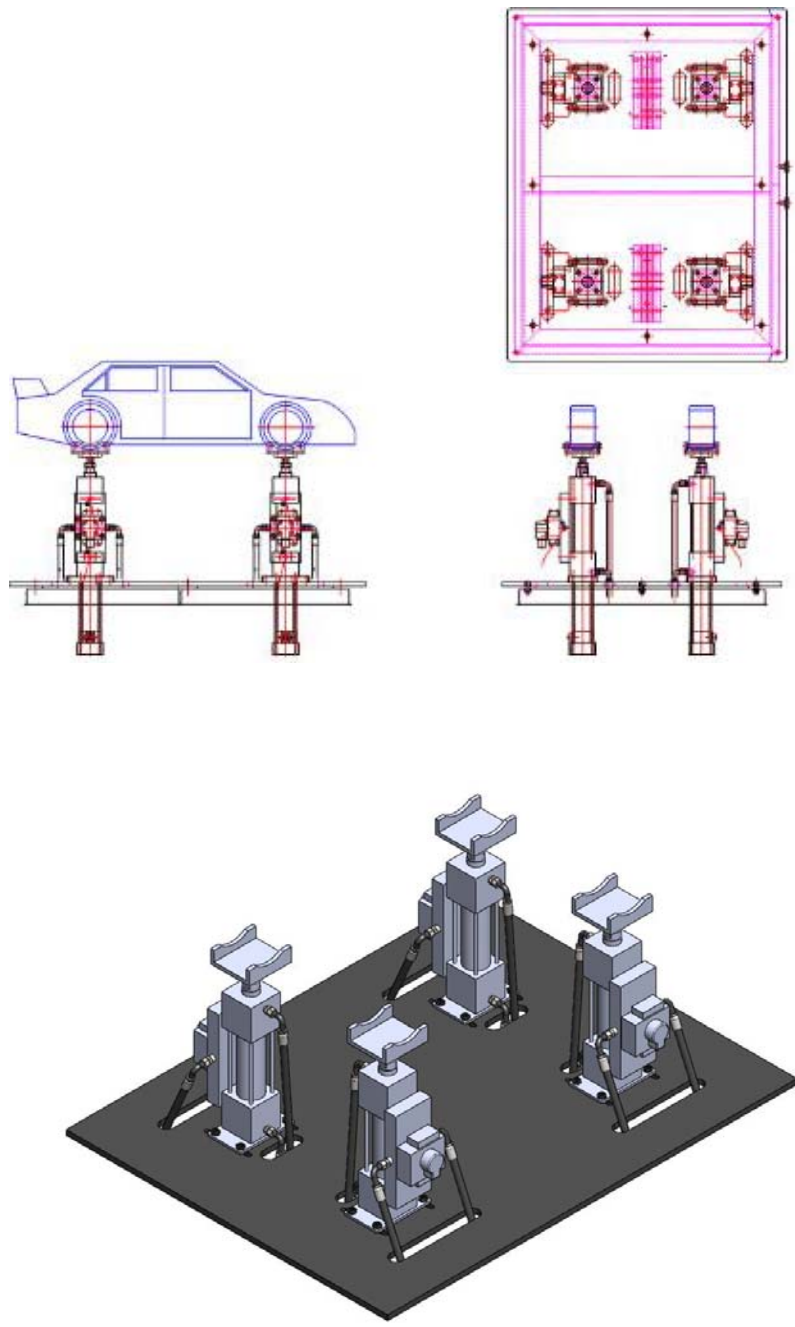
Assembly of 4-axis hydraulic actuator.
